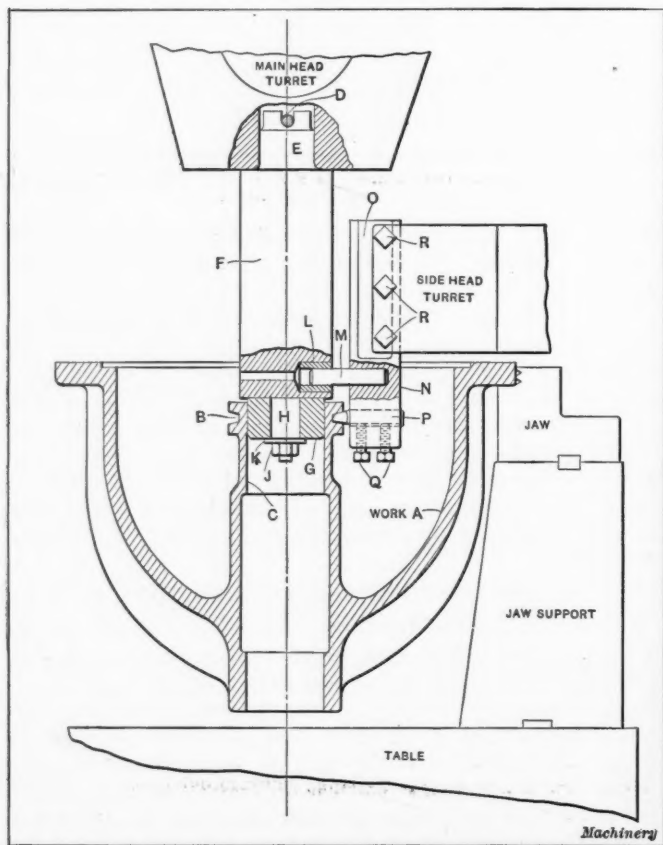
An Arrangement for cutting a Groove on the Outside of a Sleeve
